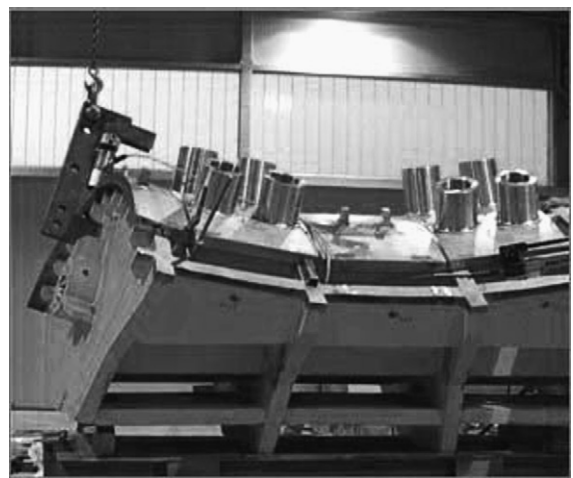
Inner shell with E-Beam welded housings and key being forced onto the jigs.
